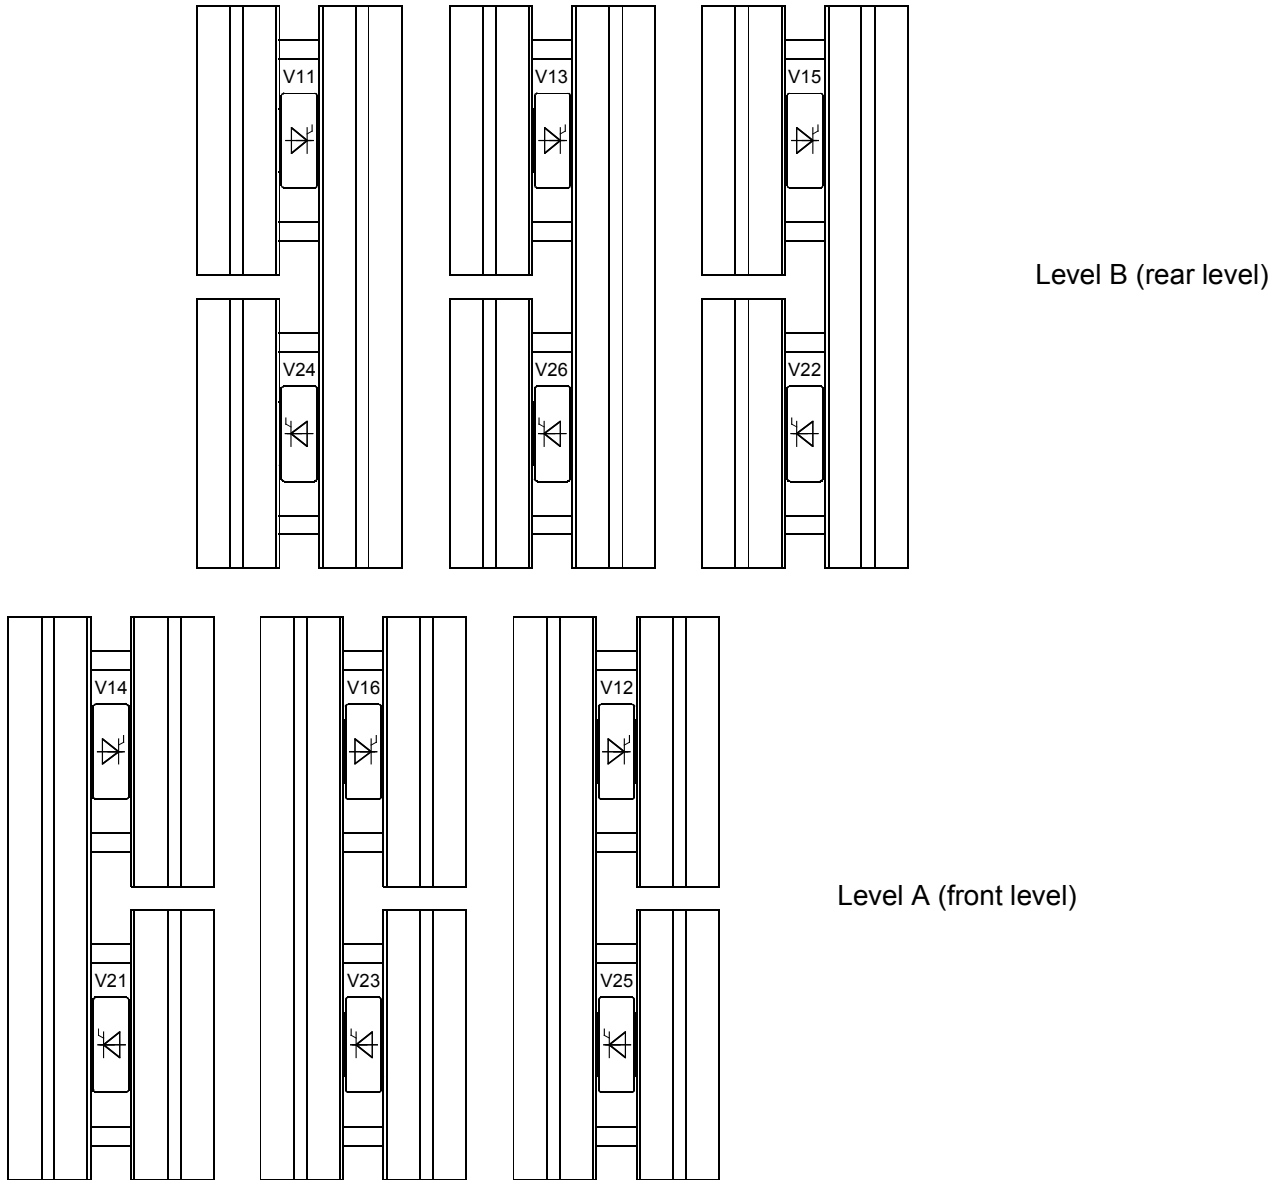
Arrangement of the thyristor blocks, Size H (see dimension drawing in Section 2.4)
